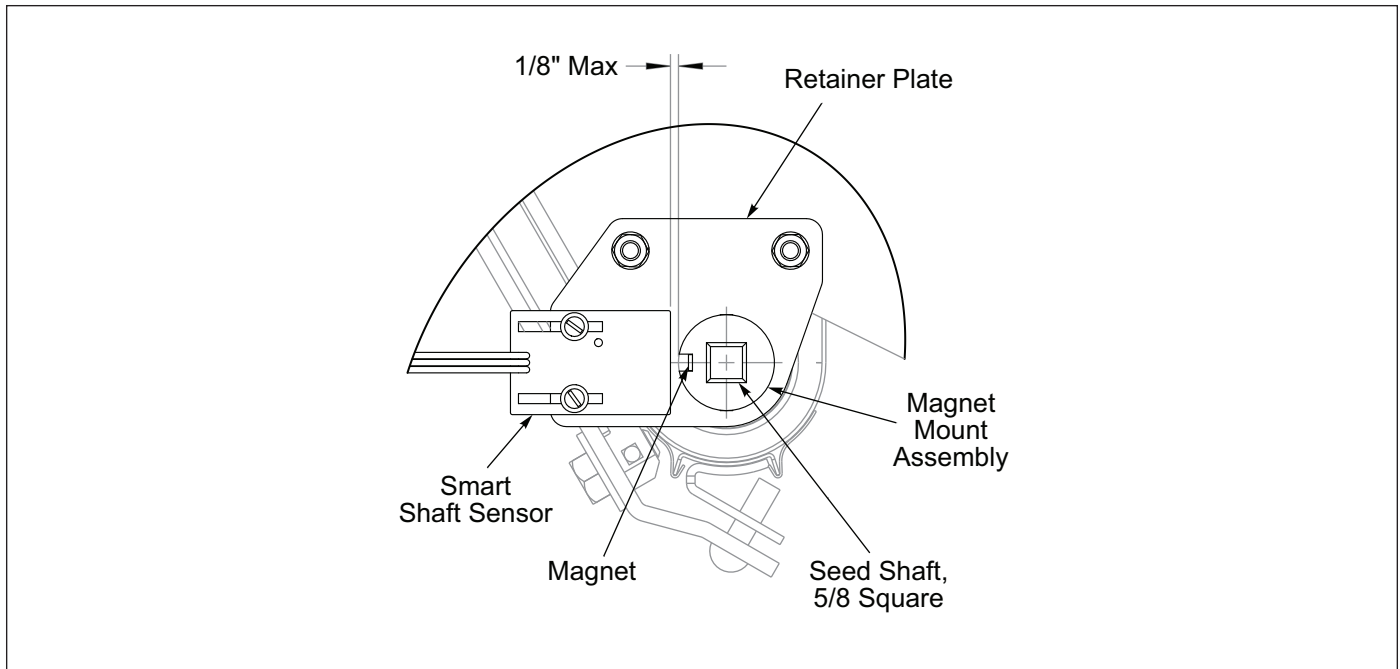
Brillion Elite Mini Monitor - Rear Brome Seed Box Seed Shaft Sensor
